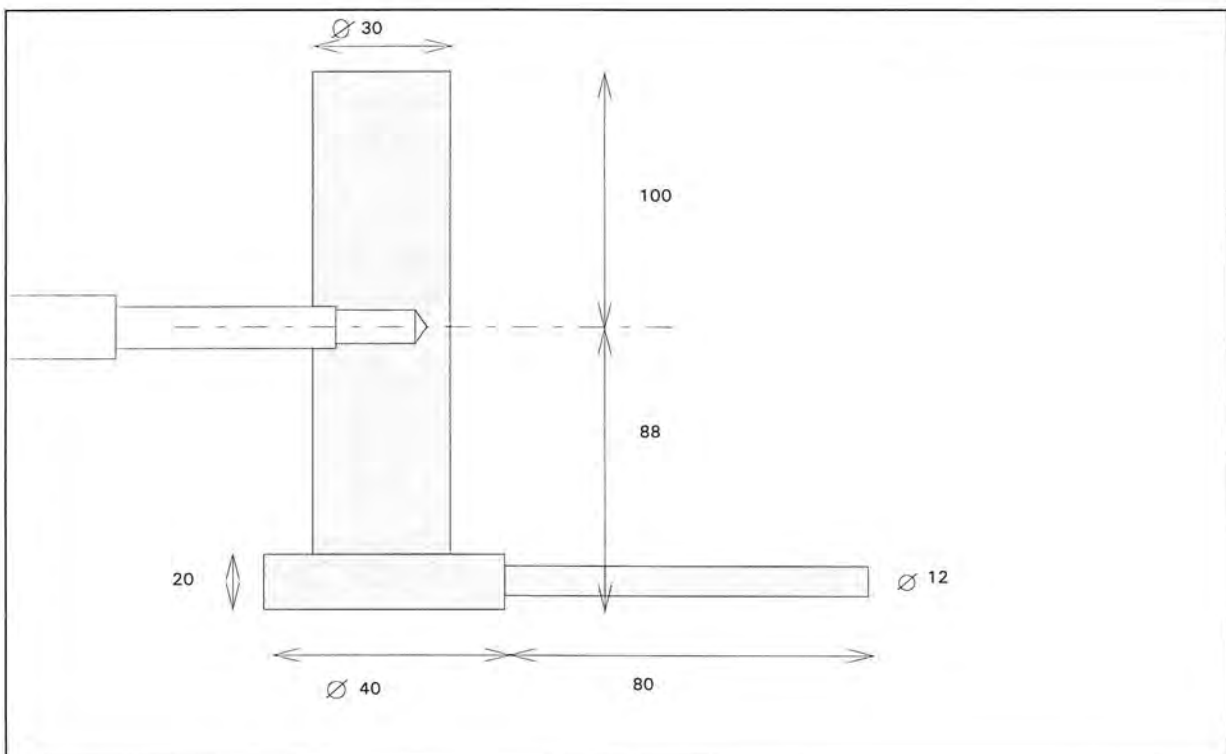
Construction drawing of the narrow cylindrical beam-coaxial (mini) phantom, in horizontal position.
